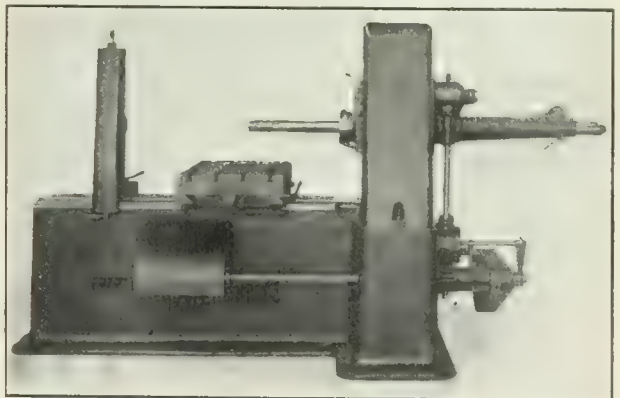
Rear View of the Combined Boring, Drilling and Milling Machine, Showing Arrangement of Motor Drive.
